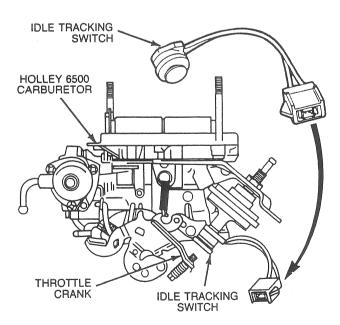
Idle tracking switch. (Courtesy of Ford Motor Co.)
